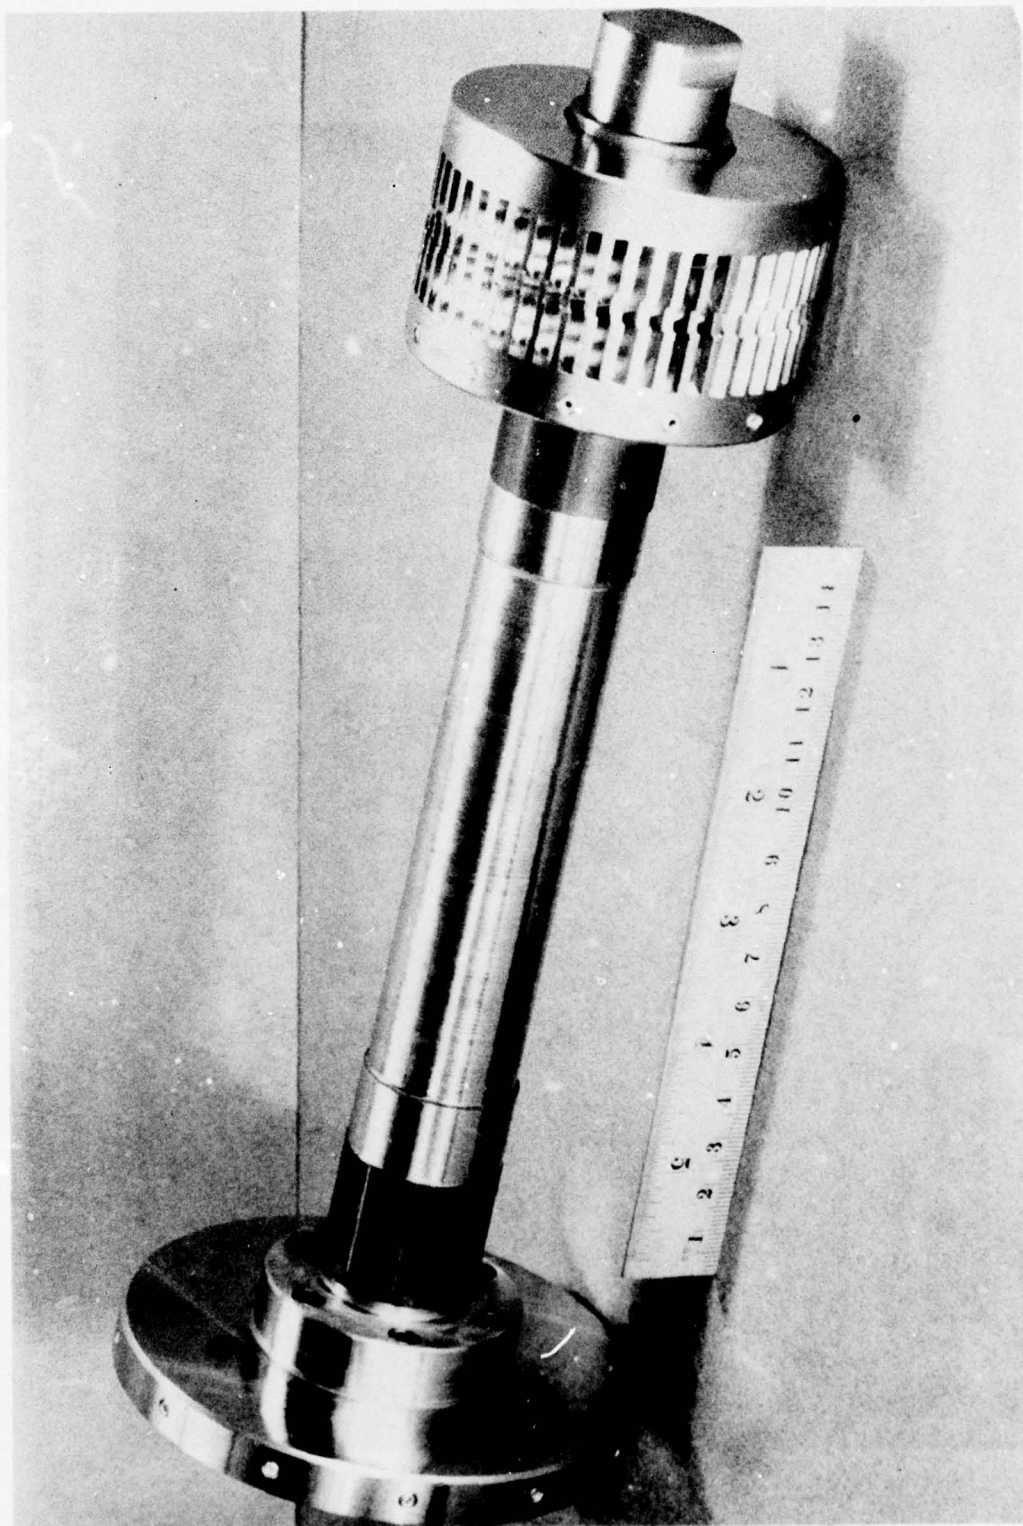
VIEW OF ROTOR ASSEMBLY
